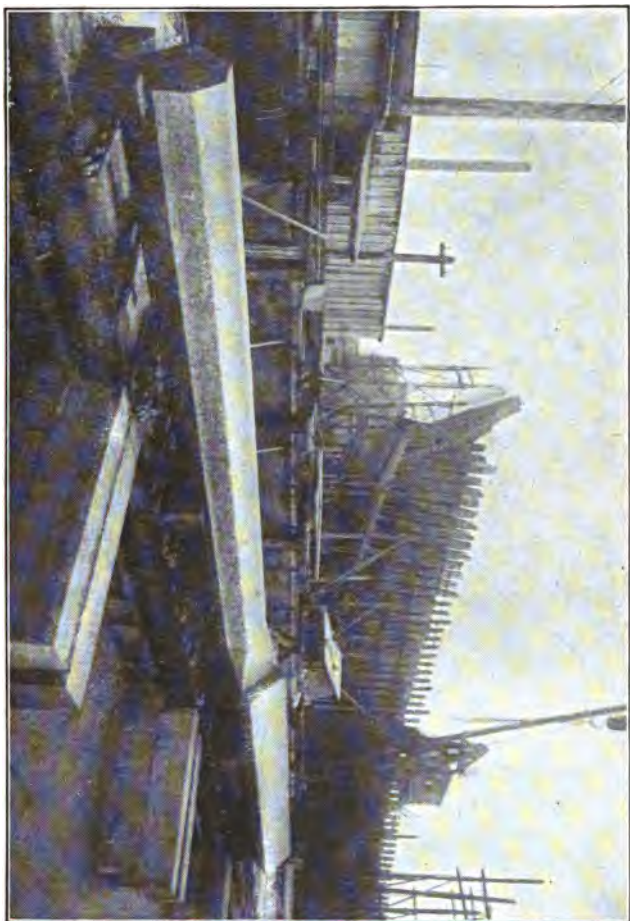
Shaping the Rudder Stock on the Beveling Machine.
